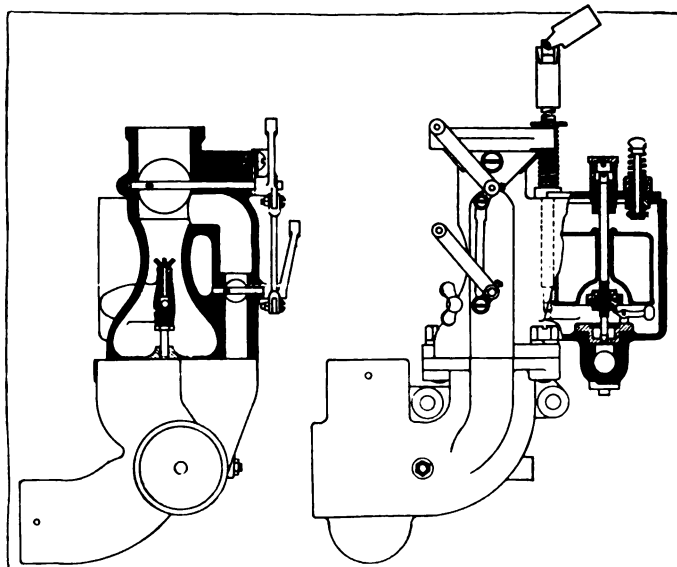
Sectional views through the carbureter used on the Franklin car. This is a Franklin product, and according to that company is a factor in securing low fuel consumption
